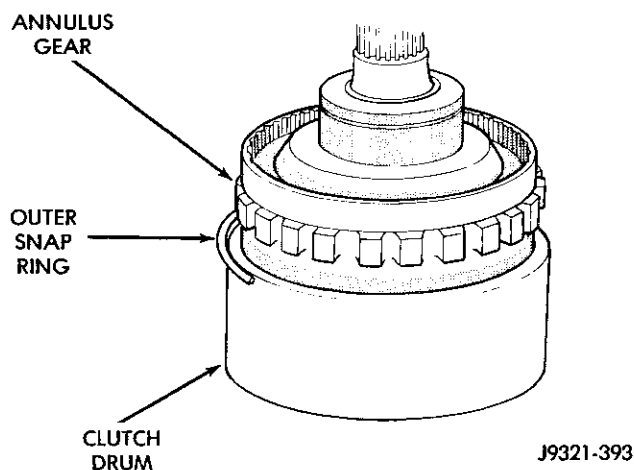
Clutch Drum And Outer Retaining Ring Installation
